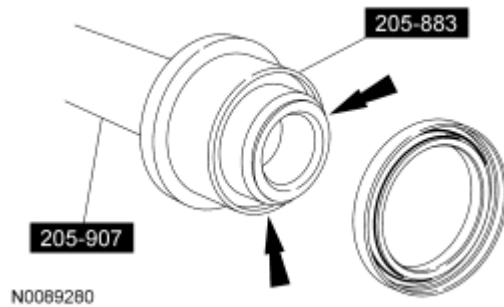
Placing Intermediate Shaft Seal On PTU Link shaft Seal Installer
